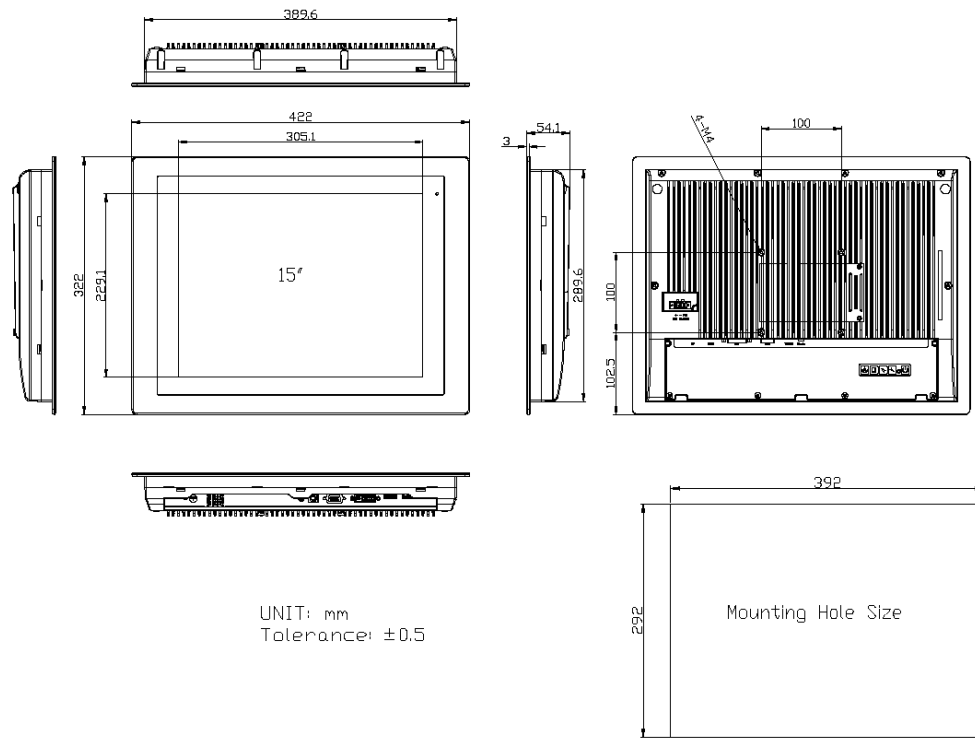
Dimensions of FABS-107PRG(H)
